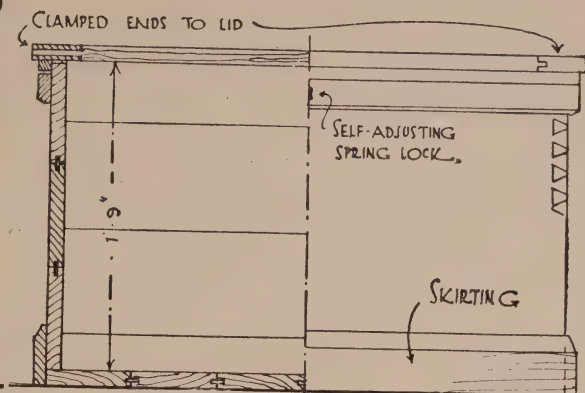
Half Longitudinal Section and Front Elevation of Tool-chest
